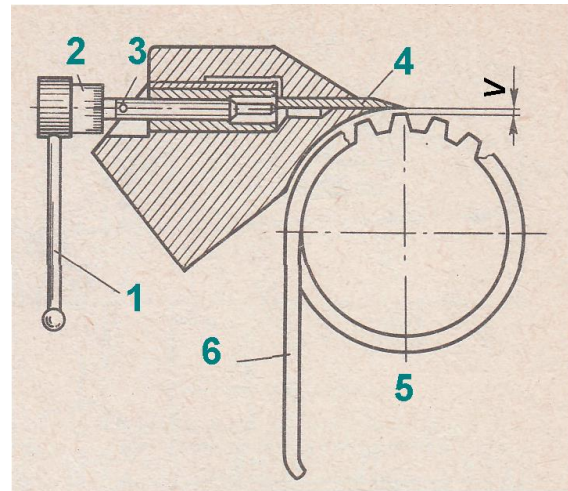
Holder: 1) handle; 2) scale; 3) set screw; 4) knife; 5) receiving shaft; 6) connector [2, 3]
